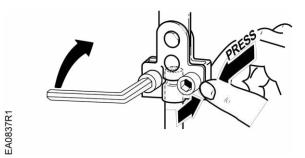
Connecting the Linkage Stem Coupling on the Valve Stem.
